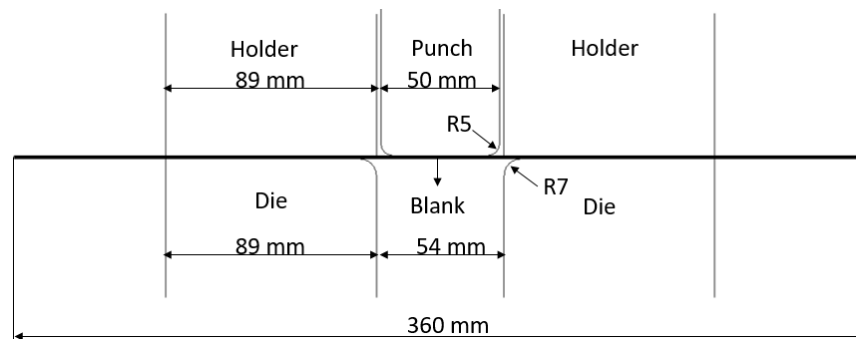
Drawing of the setup for hat-shaped draw-bending process. The sheet is 360 mm long and 1.4 mm thick.
